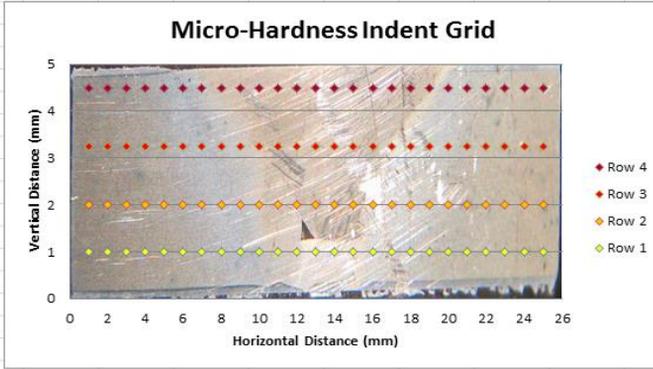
Position of indents on tapered cylinder weld sample
